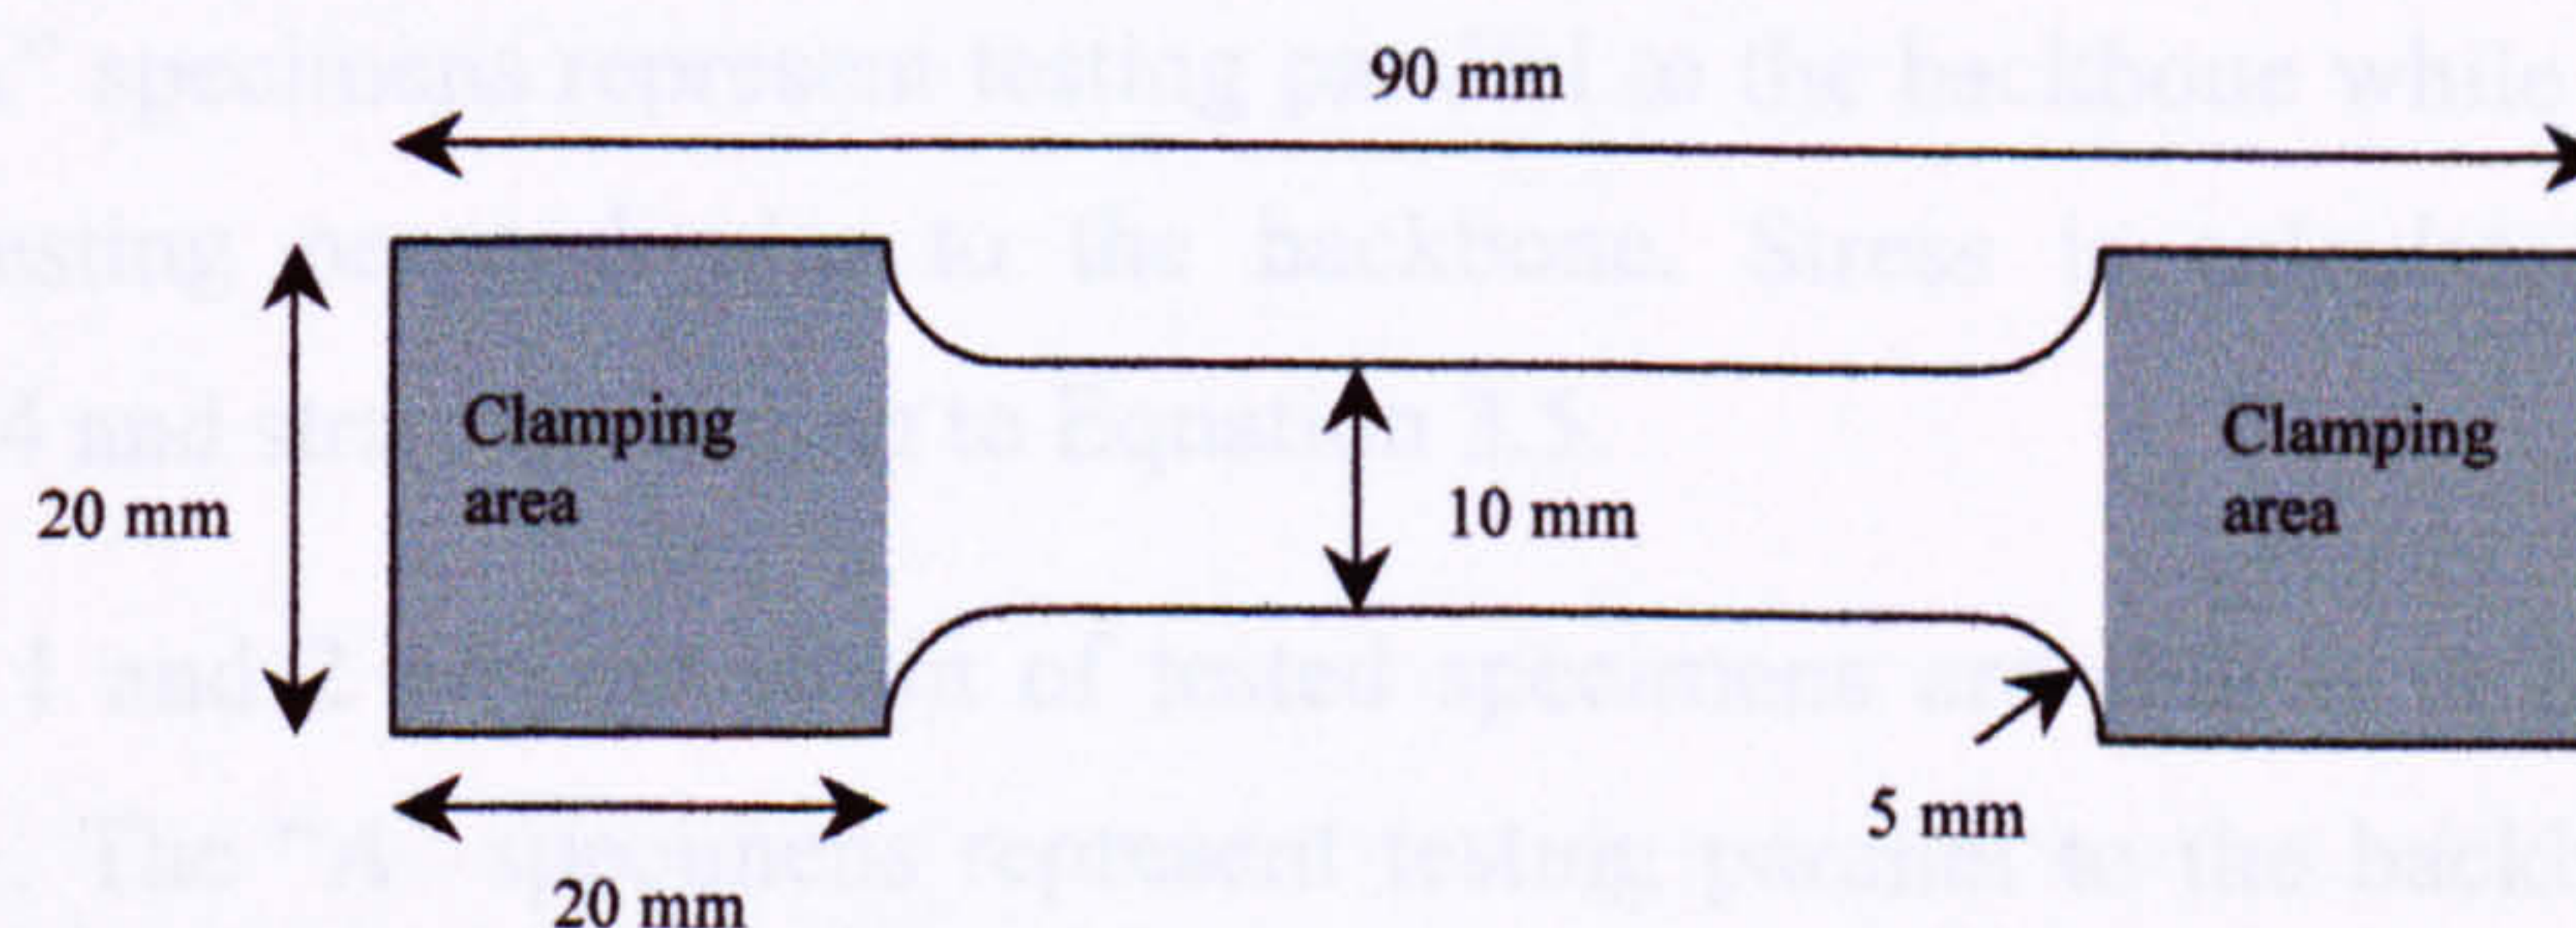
Shape and dimensions of specimen for tensile testing.
